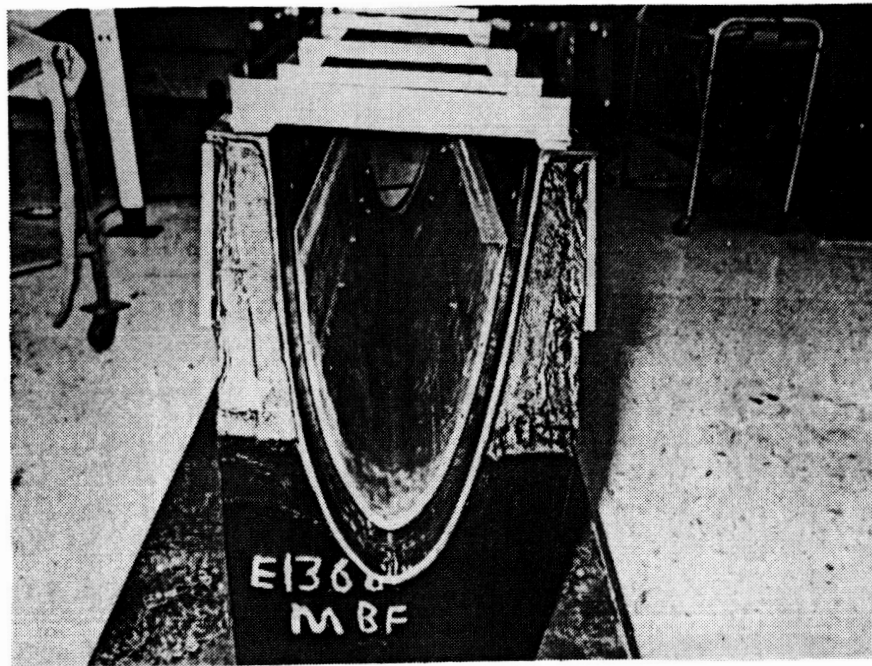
Substructure Assembly with Outer Skin in Place and Cured. Holes for Attaching the Upper and Lower Attach Angles had also been Drilled
